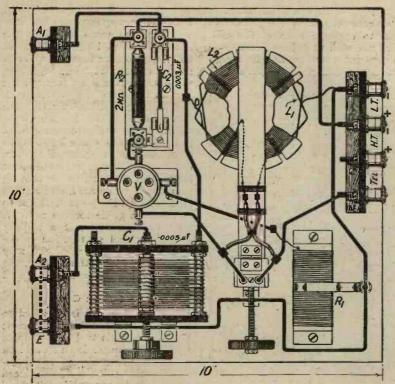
When all parts have been mounted in position, wiring is carried out as shown.
